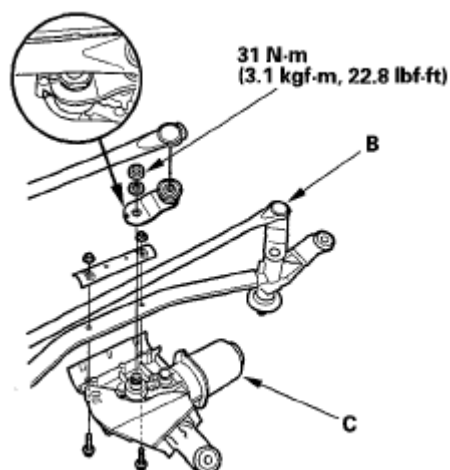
Identifying Windshield Wiper Linkage From Wiper Motor With Torque Specification
